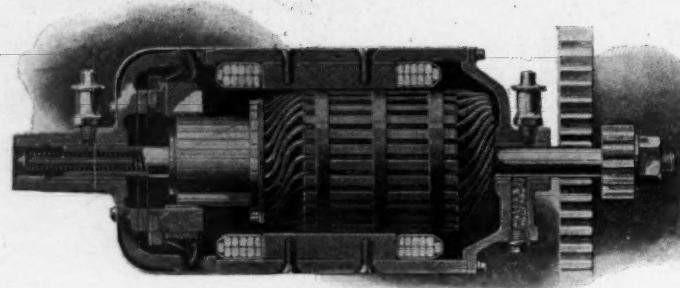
Sectional view of old Bosch-Rushmore starter. It is still a feature of Bosch products but has been improved decidedly
